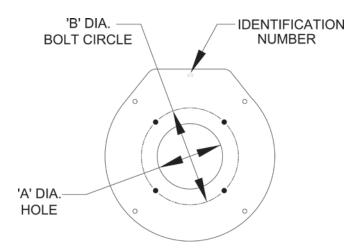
Install Burner Adapter Plate and Burner to Burner Swing Door
